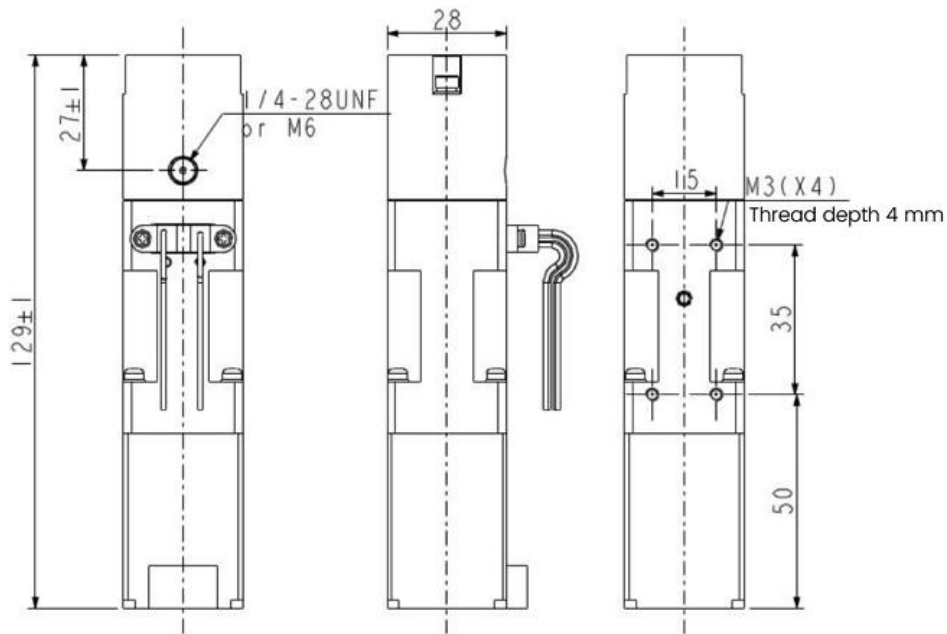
Conventional Cylindrical Pump Head Outline Dimensions
